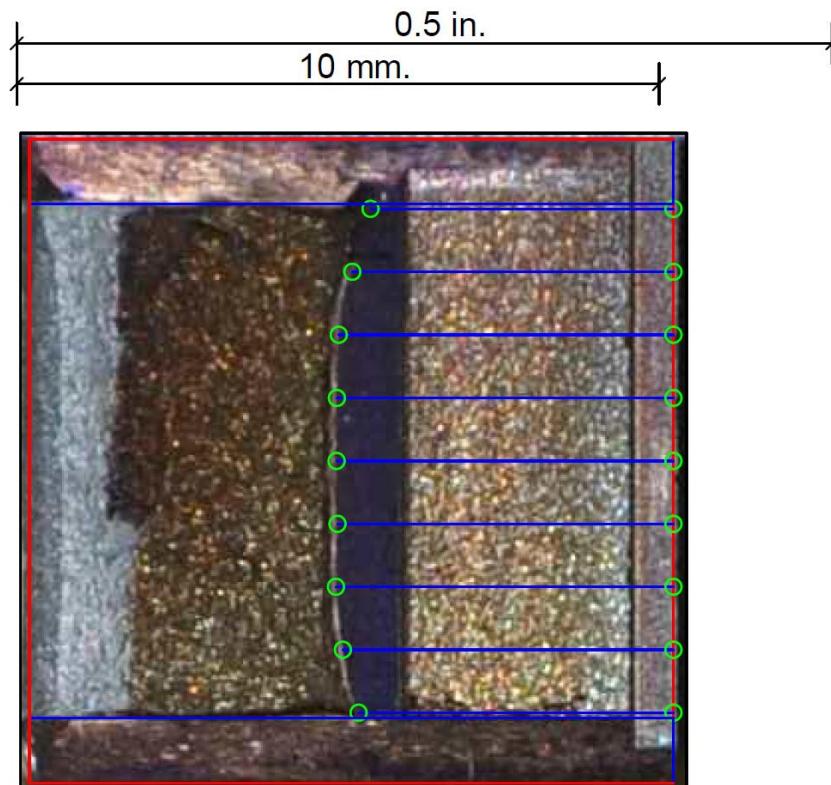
Specimen I18' Fracture Surface
